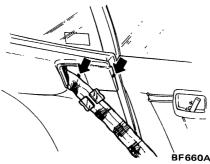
Removing shoulder belt (for GS30 2 + 2 seater models)
